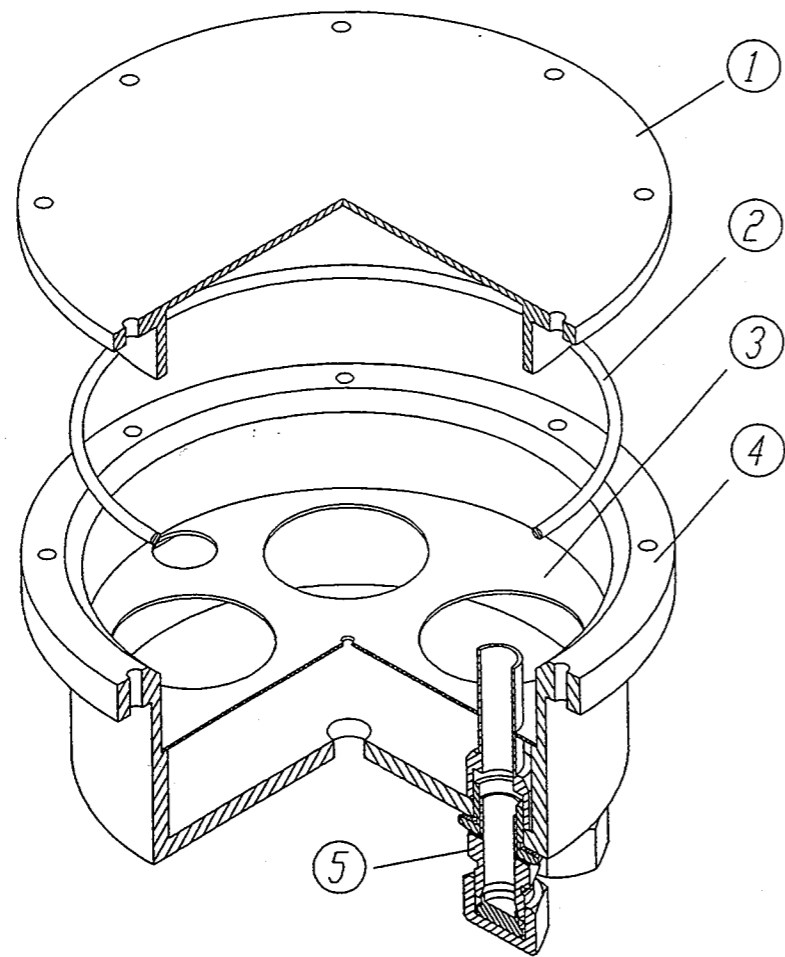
General view of the container: 1.- Lid. 2.- O-Ring. 3.- Intermediate plate. 4.- Frame. 5.- Hosepipe connector.
